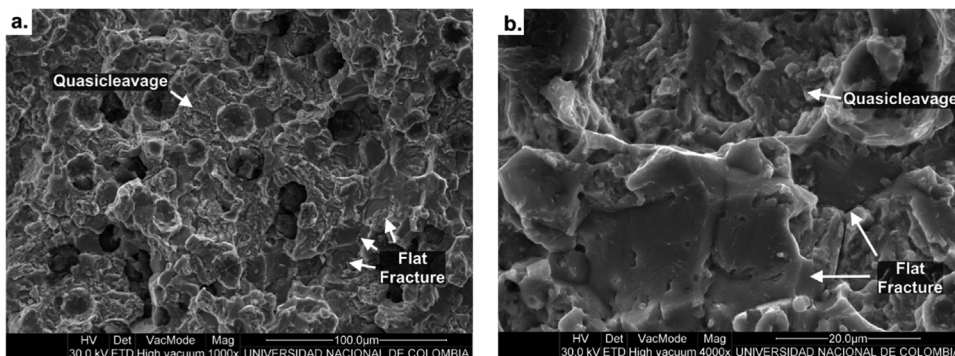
Fracture surfaces of the austempered samples: (a) general view, (b) detailed morphology.
